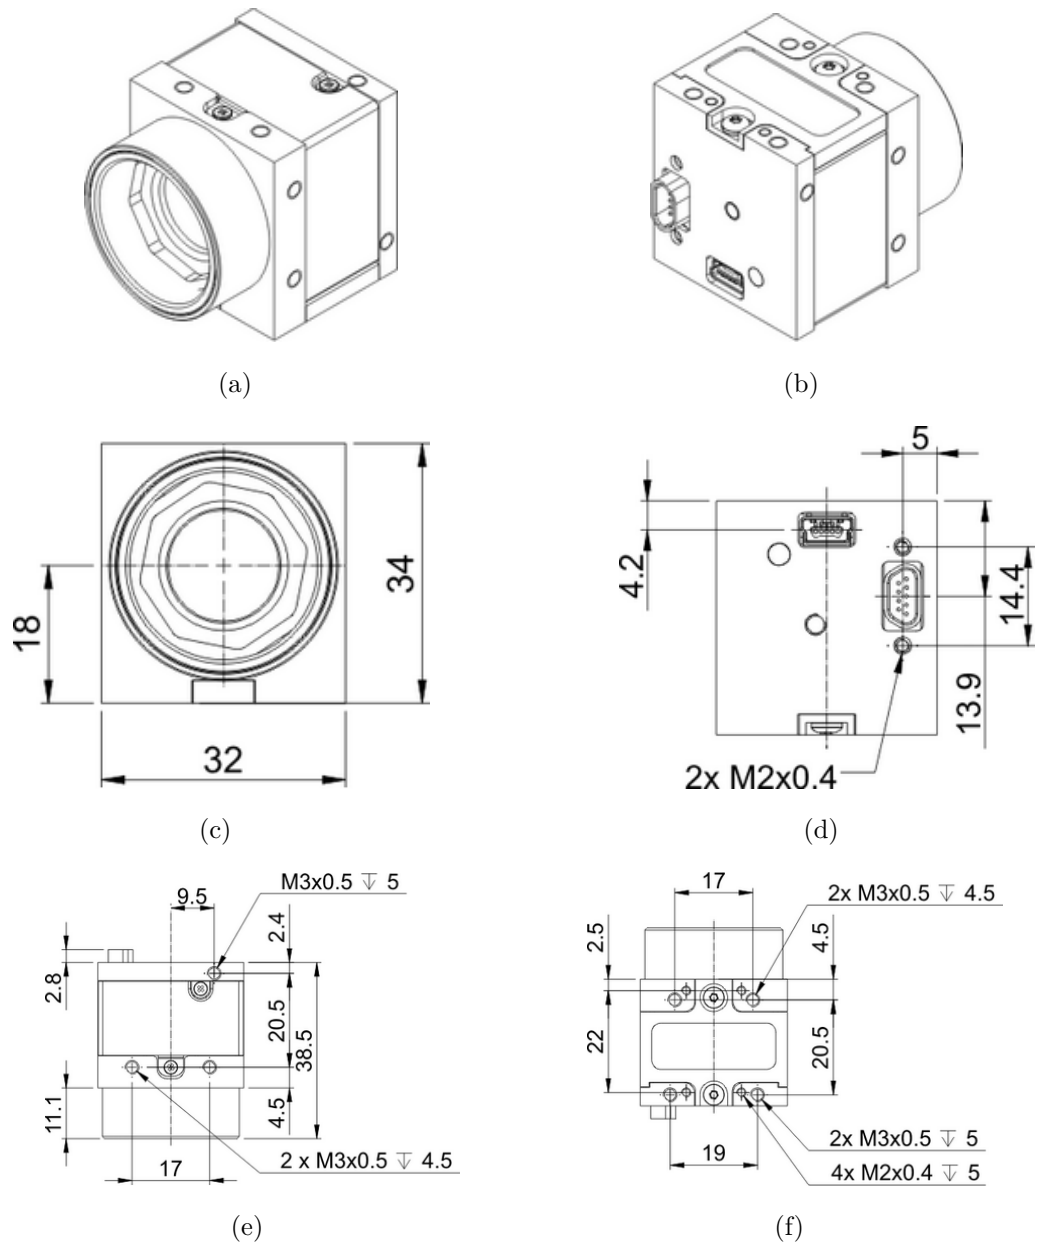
Mechanical specifications of used cameras. [a-b] 3D view, [c] rear view, [d] top view, [e] bottom view
